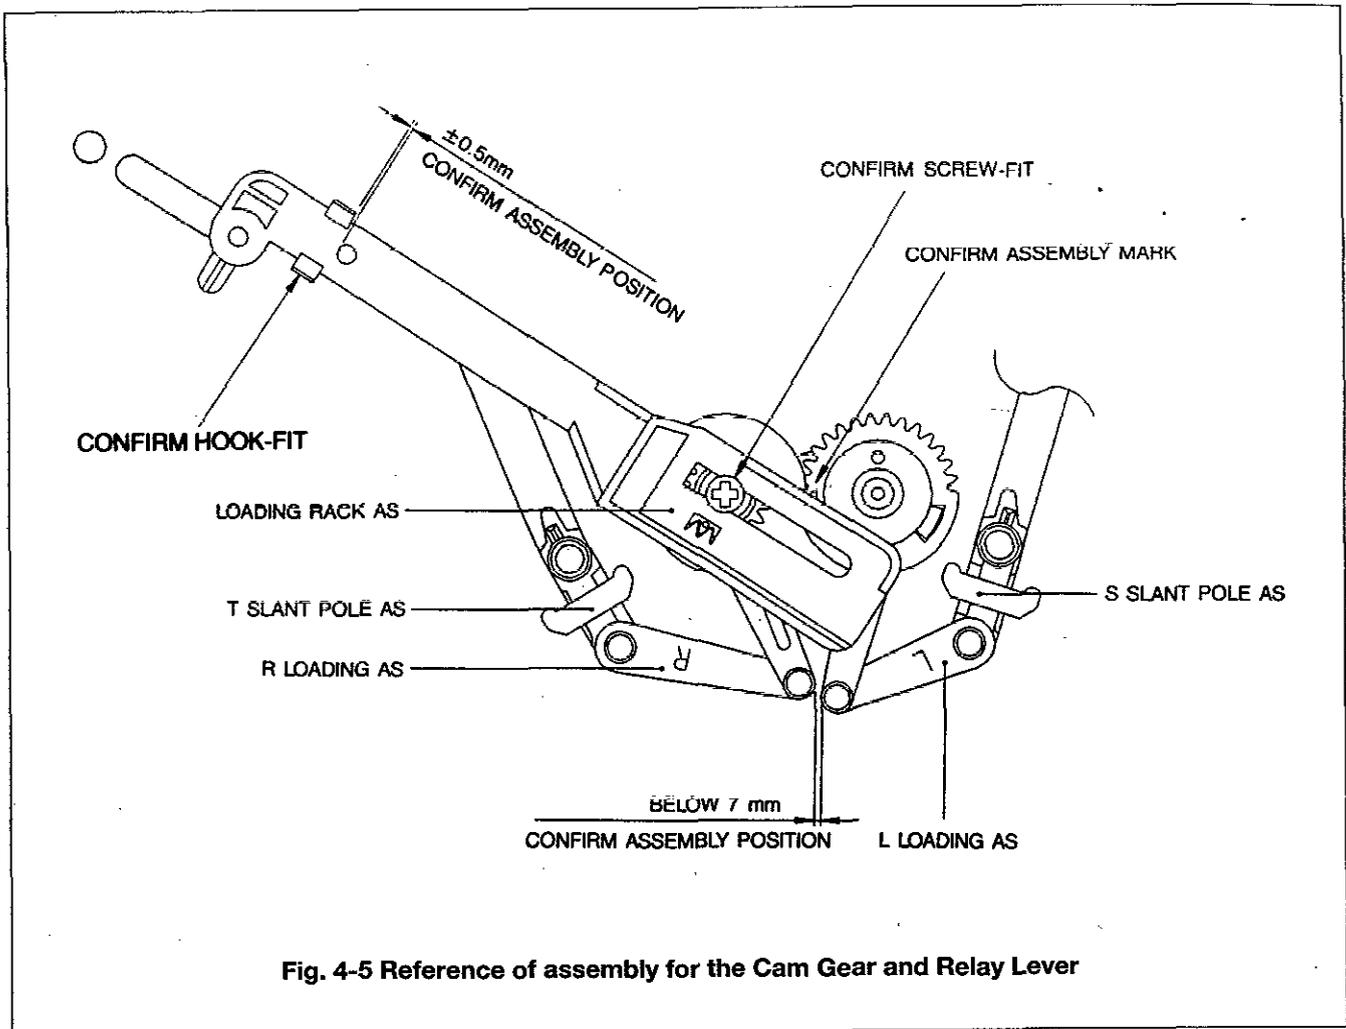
Reference of assembly for the Cam Gear and Relay Lever
